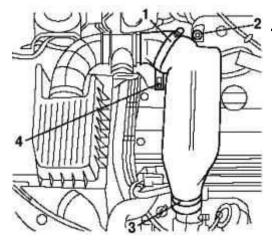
Mounting inlet pipe: 1, 3, 4 - clamps, 2 - screw fixing
